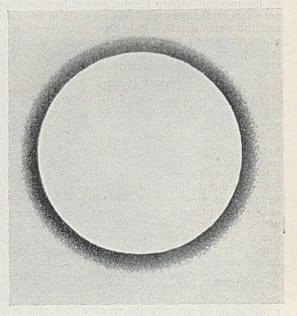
Auto-radiograph of Section through Carburized Steel Container.
